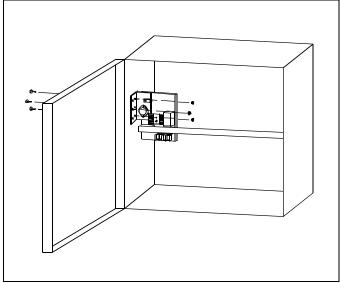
Mounting into a Napco universal housing. Use the template shown in Fig. 5.
